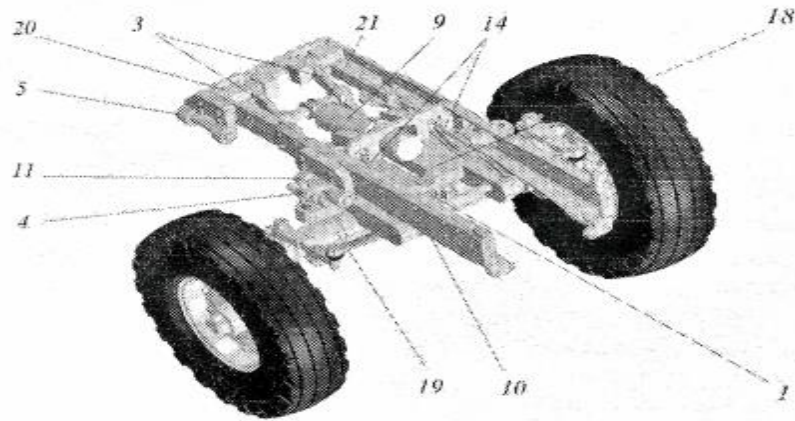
Tractor wheelbase adjustment mechanism directly driven by a hydraulic cylinder.
